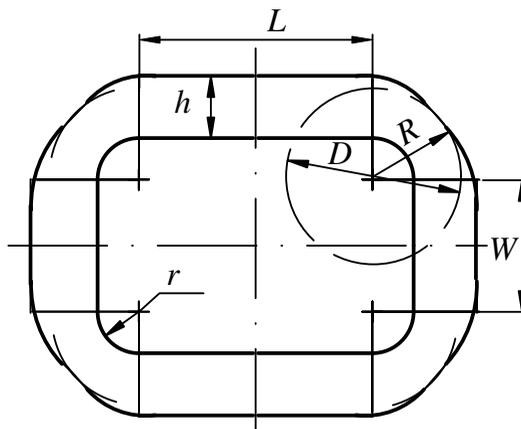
Layout Design for Deep Drawn Rectangular Shell
